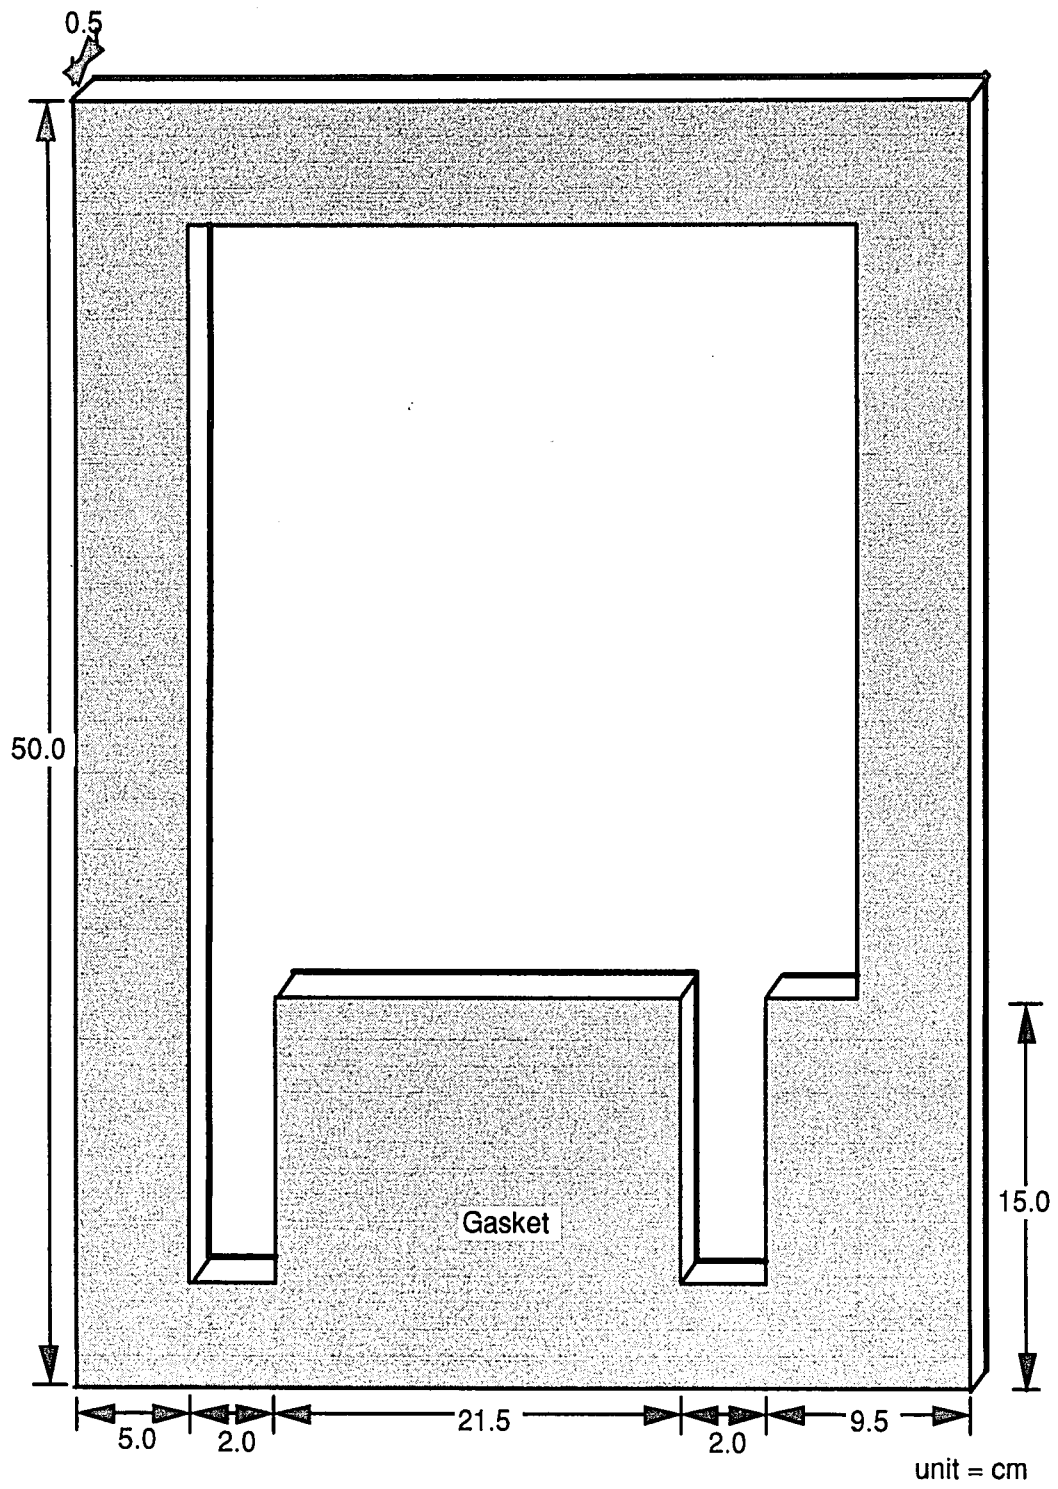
Dimension of mold spacer plate for two-dimensional experiments
